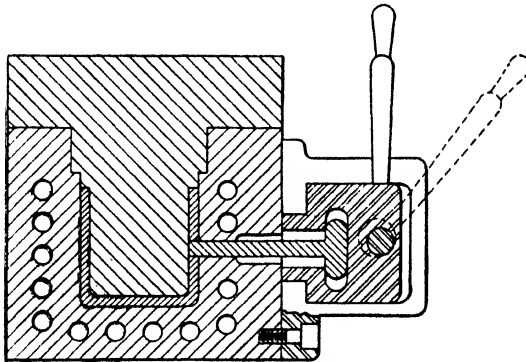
Sketch of a mold and molding in which a side core is required to form a hole or holes in one side wall. The core has to be withdrawn, of course, before the molding can be ejected and must be locked in place securely before the next molding is made. An eccentric on a lever is used in this case to actuate and to lock the core, and all the mechanism to the right of the cavity block, as well as the core itself, and the extra machining on the cavity block greatly increase the cost of the mold as a whole.
